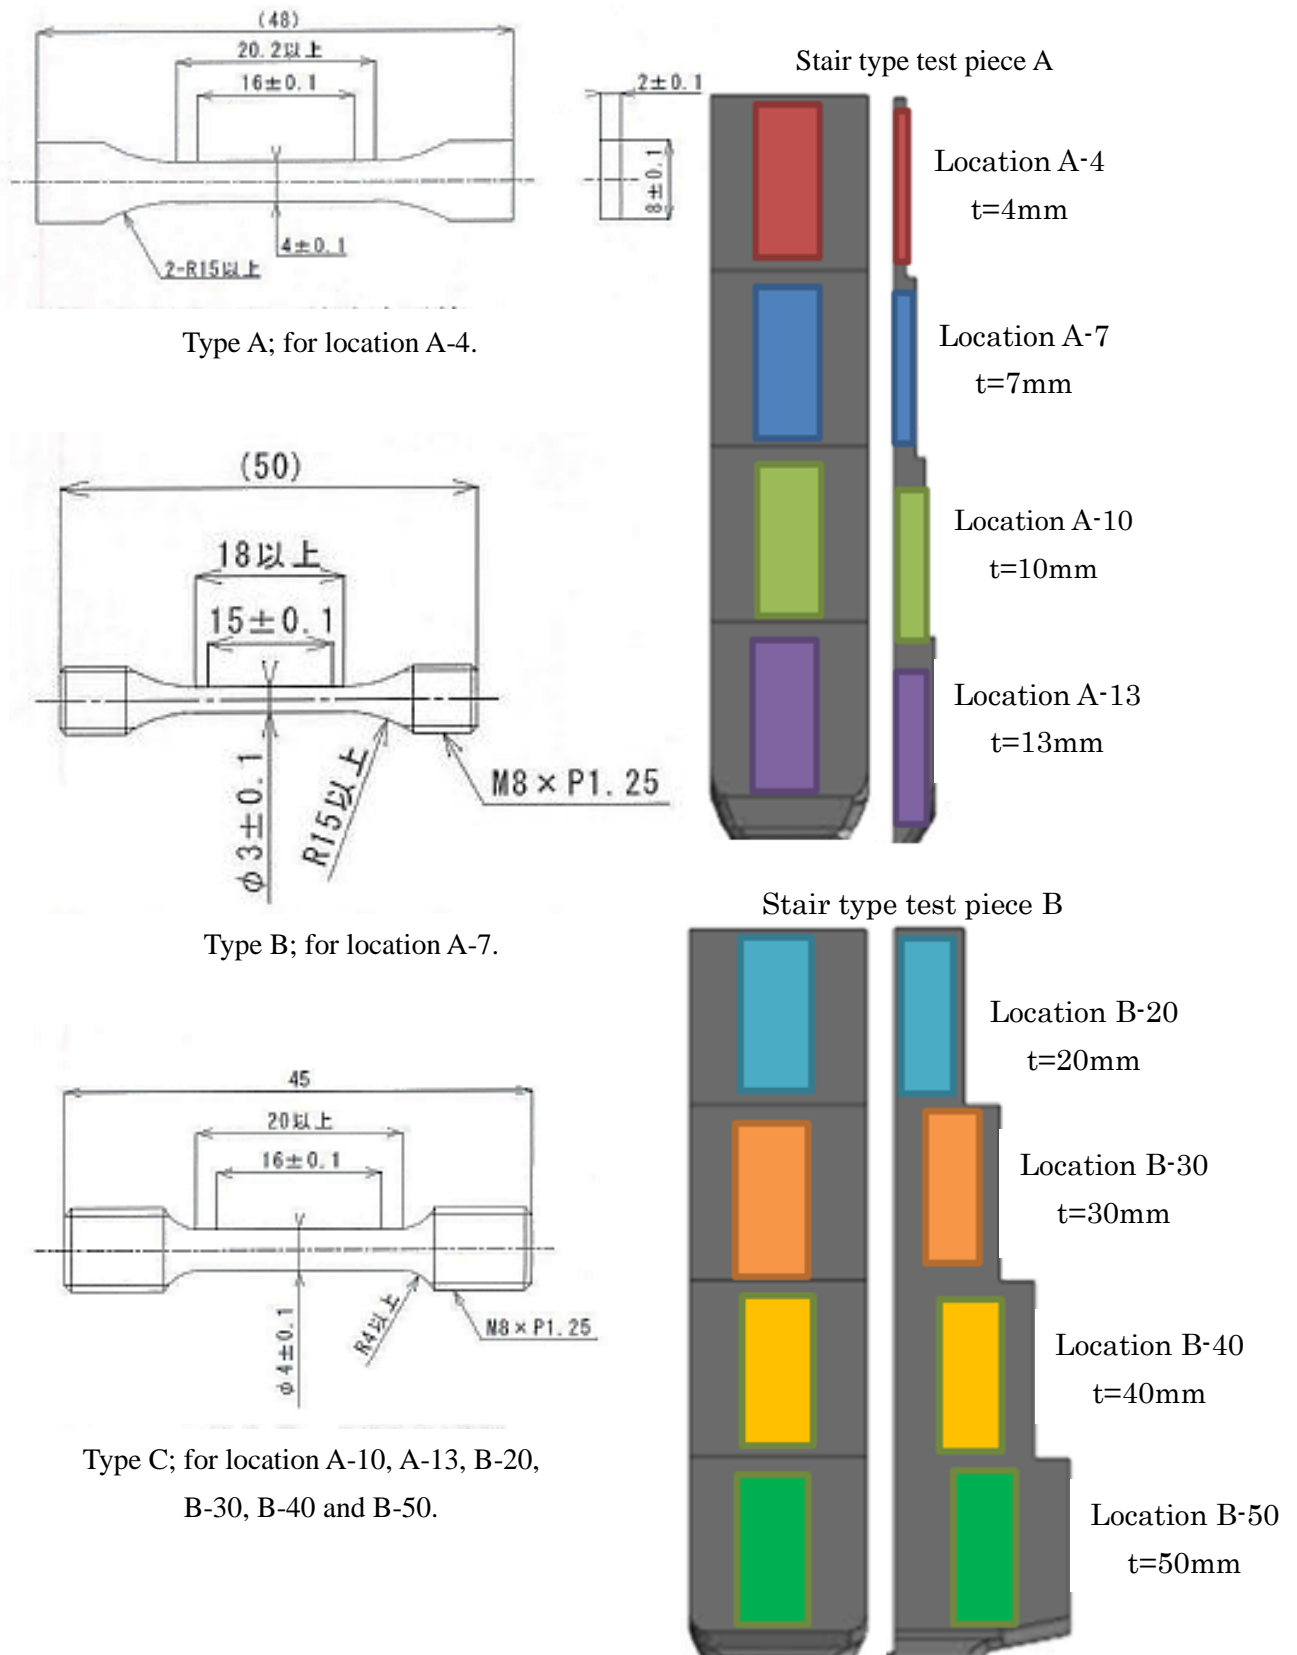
Geometry of the specimen for tensile test (in mm).
